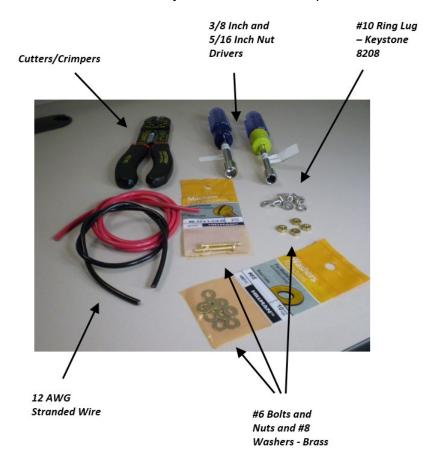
Power Cabling is Assembled Using Common Components and Hand Tools
